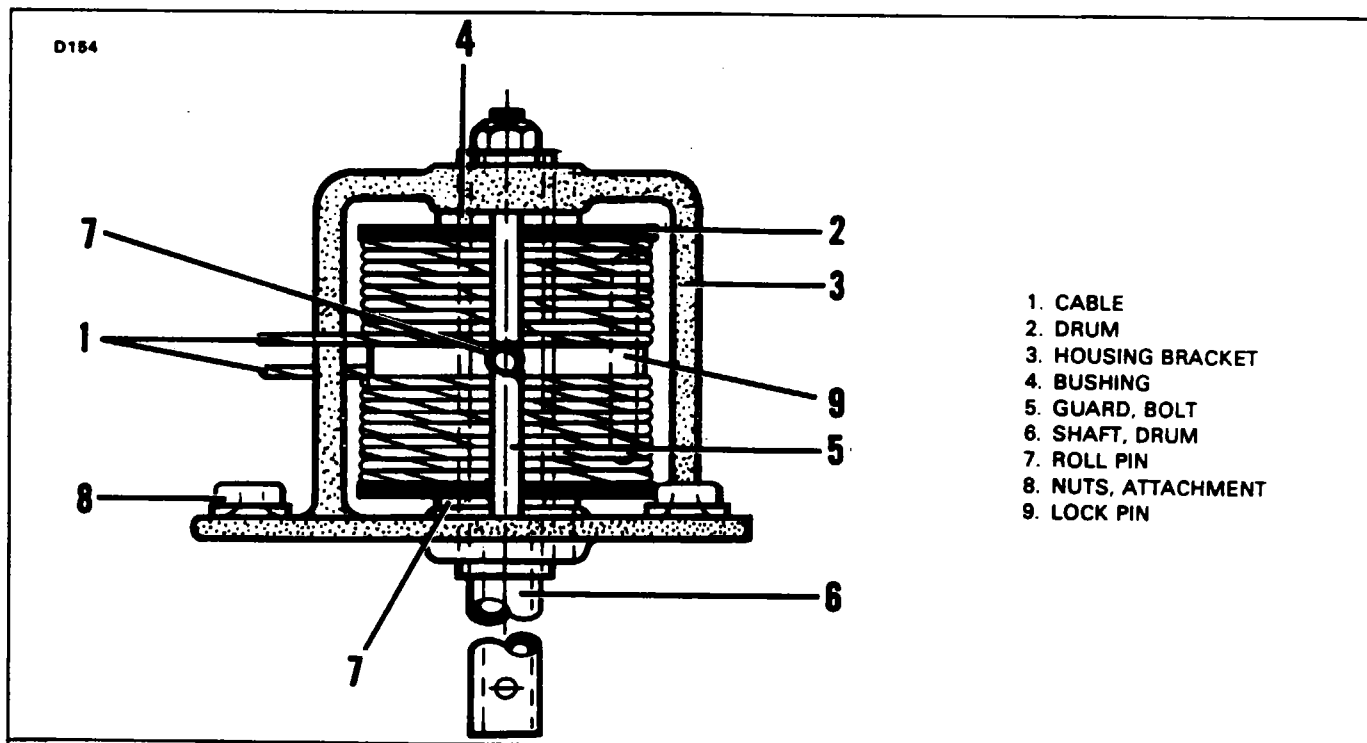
Wrapping Elevator Trim Drum (Control Pedestal)
